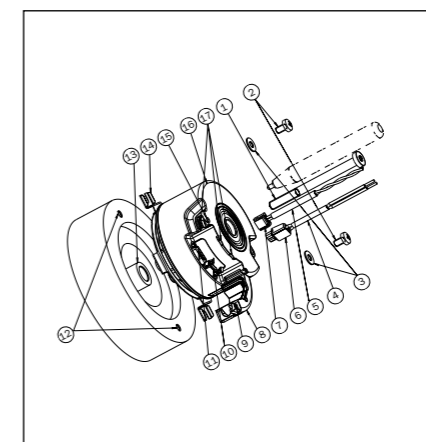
Mounting diagram for conical shaft with spring plate stator coupling
